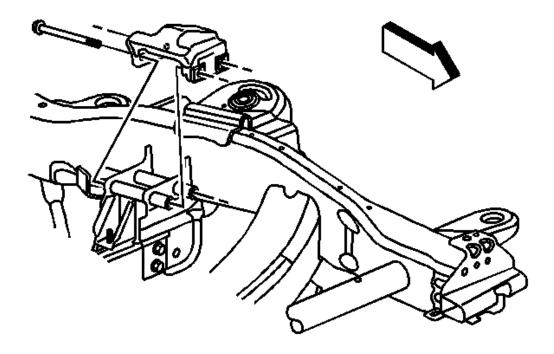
View Of Left Engine Mount Bracket Bolts Courtesy of GENERAL MOTORS CORP.
